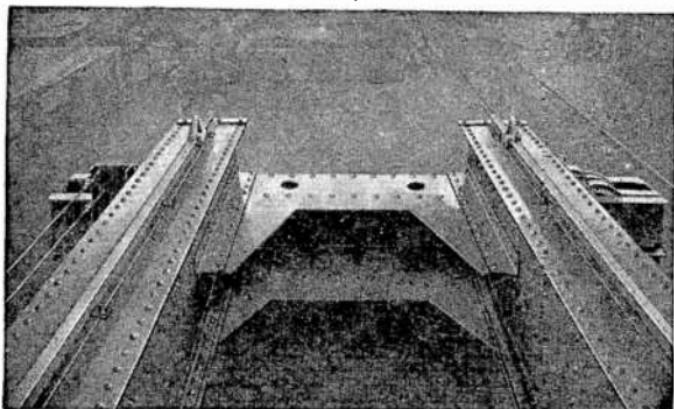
,875.—*Euclid crane construction 2. Gusset plates.* These are used to tie the girders to the end trucks, making it impossible for the crane to weave and get out of square on the runway.
